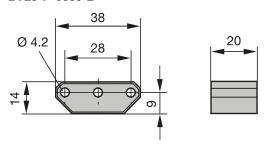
Installation dimensions of BTL5-P-3800-2 magnet
